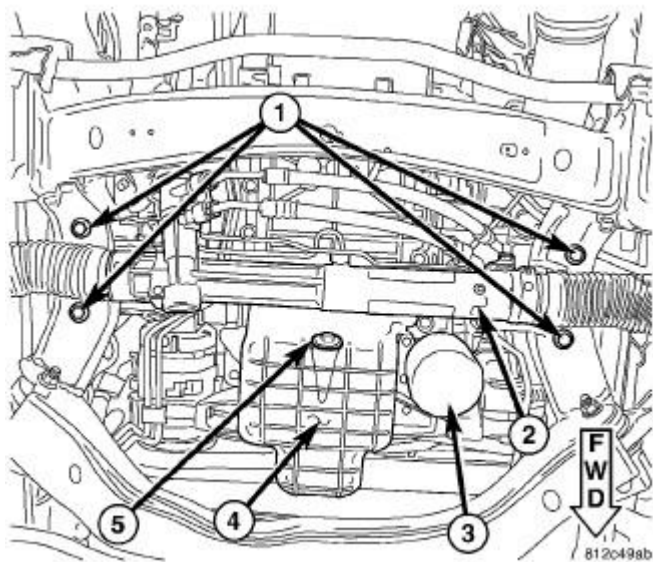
Identifying Engine Mounts, Oil Pan, Drain Plug & Oil Filter
